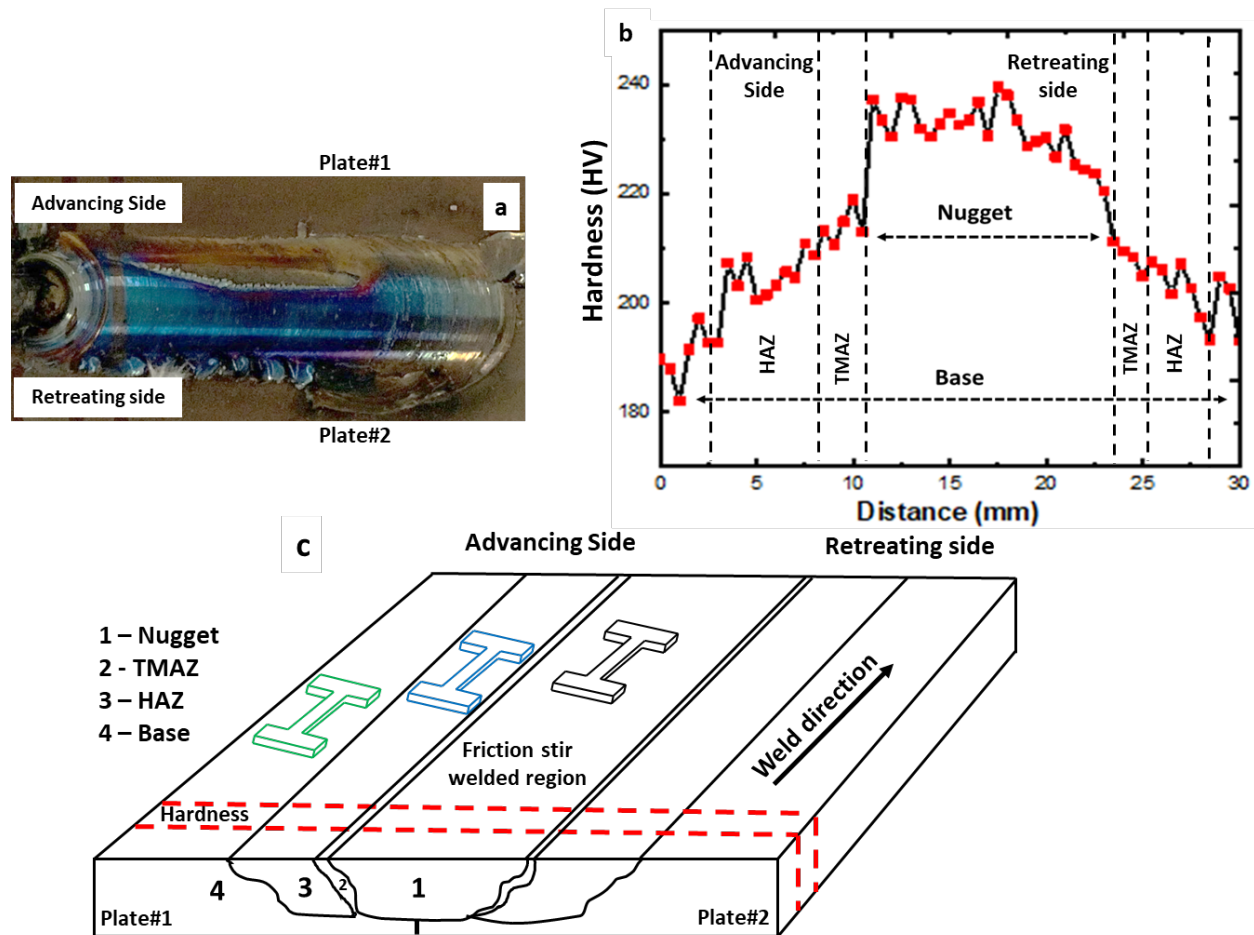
(a) Macro-image of welded block via friction stir welding (FSW), (b) hardness profile across the cross-section of FSW run, and (c) schematic of the FSW and locations marked for the tensile samples machined out.
